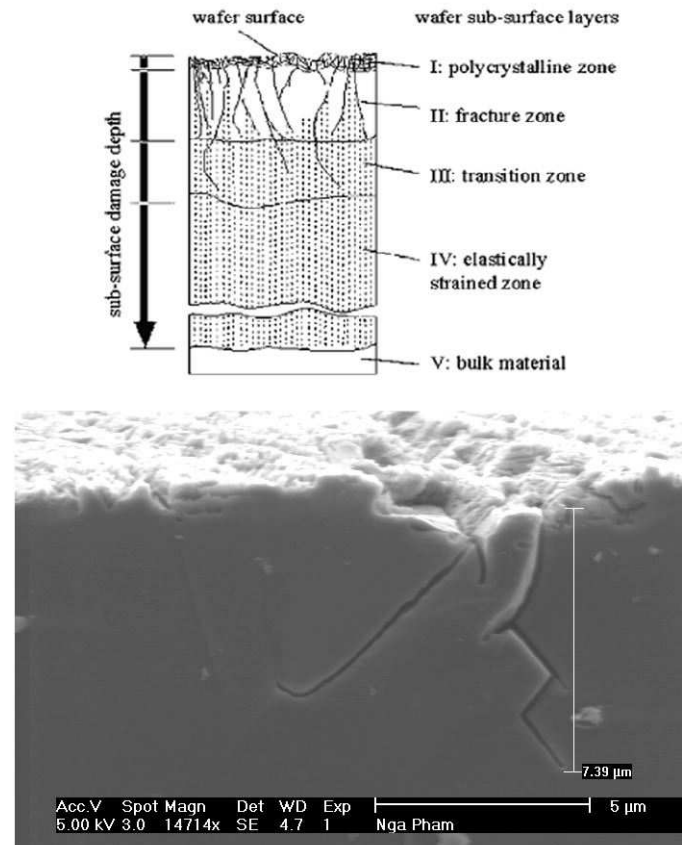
Sub-Surface Damage stack (top) and SEM image of cracks (fracture zone) introduced because of the rough grinding process (bottom) [8].
